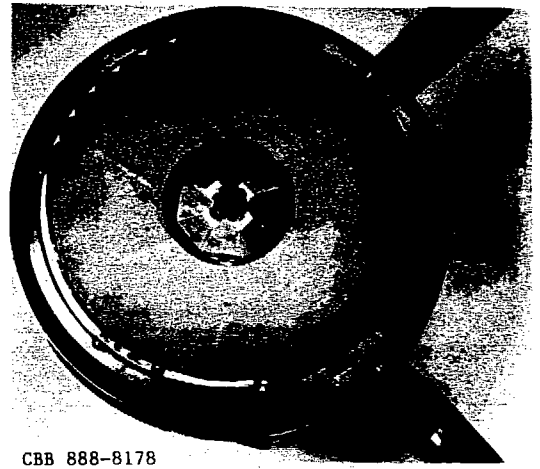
Photograph of the laced quadrupole magnet. The diameter of the magnet is 10". Samarium cobalt permanent magnets (with arrows) fill the space between the poletips. The shell of the drift tube is welded to the yoke in a complete assembly.
